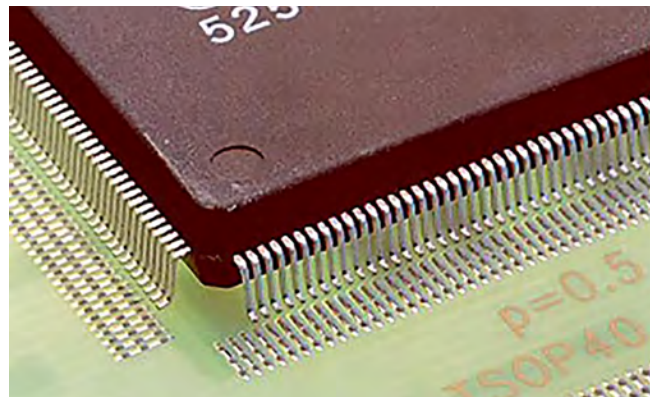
Dispensed solder paste on ultra-fine-pitch SMT component.
